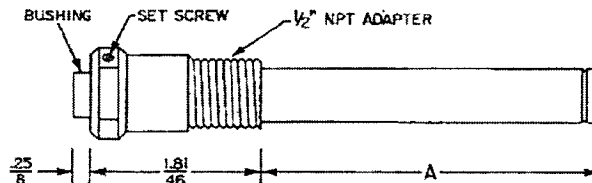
Part Number FTG13A-600R Packing Nut Assembly. (Use with clamp-on bulb for direct immersion application.)
